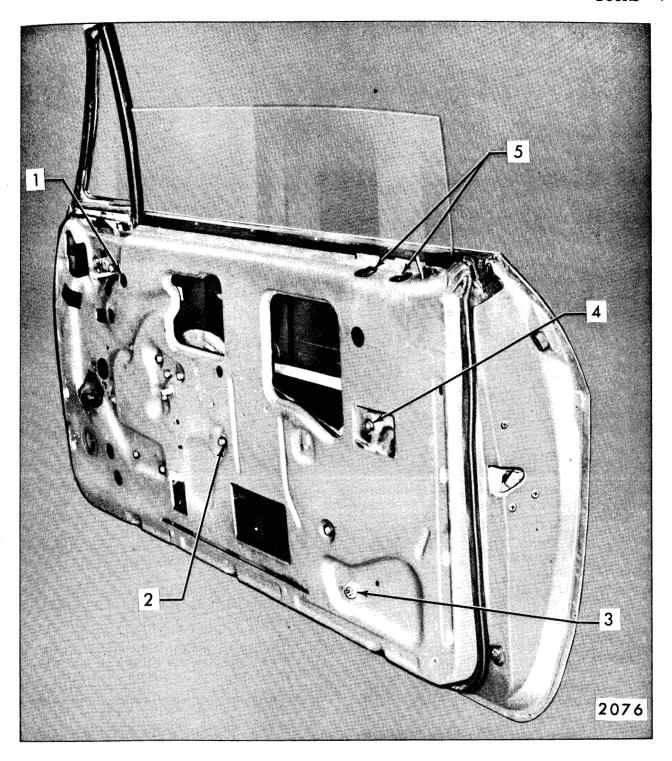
Front Door Window Removal - "B & C" Hardtop Styles
